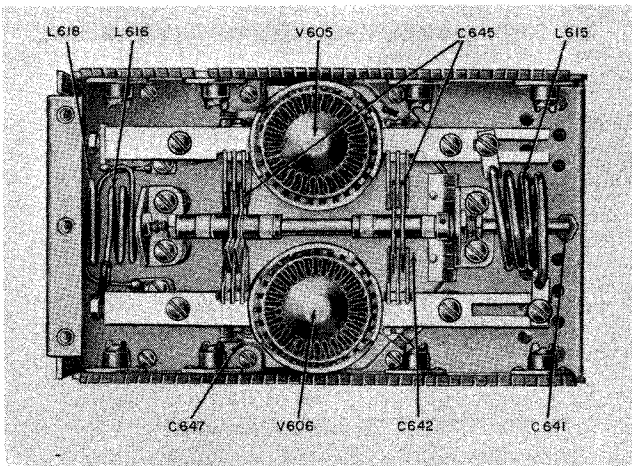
Power Amplifier Shelf Assembly, Top View
